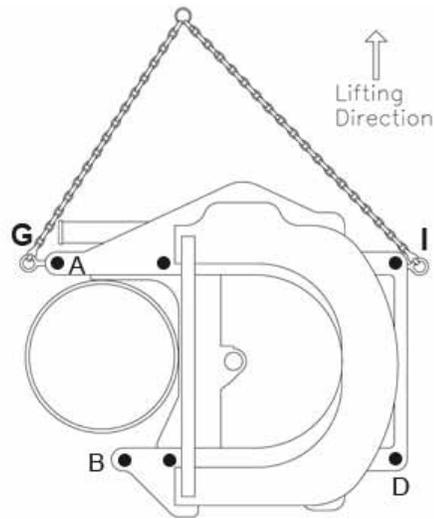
Use eyebolt locations G and I to mount the saw on the side of a horizontal pipe.
